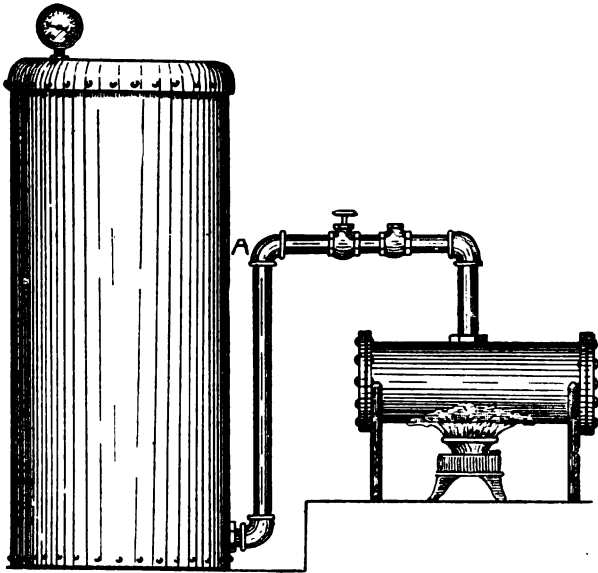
THE OXYGEN GENERATOR AND TANK WITH A CUT-OFF VALVE AND ALSO A CHECK VALVE IN THE PIPE
